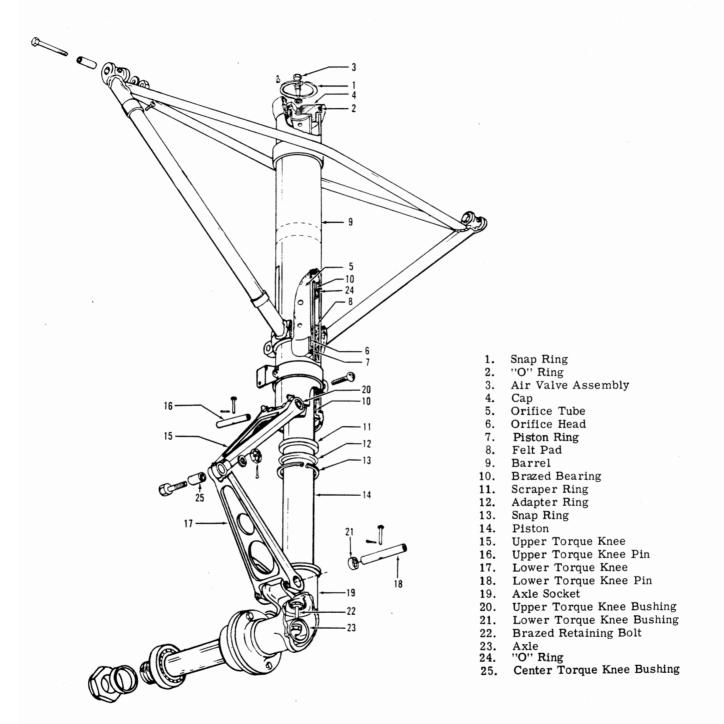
Main Landing Gear Shock Strut Assembly (Airplane Serial TD-252 thru TD-523)
